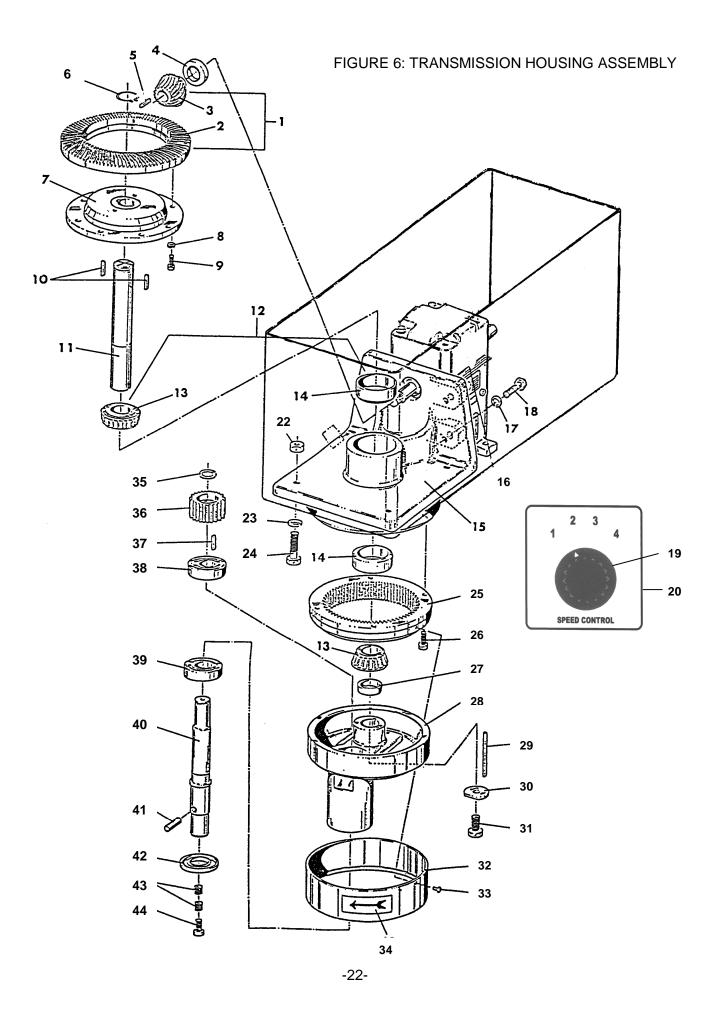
TRANSMISSION HOUSING ASSEMBLY
